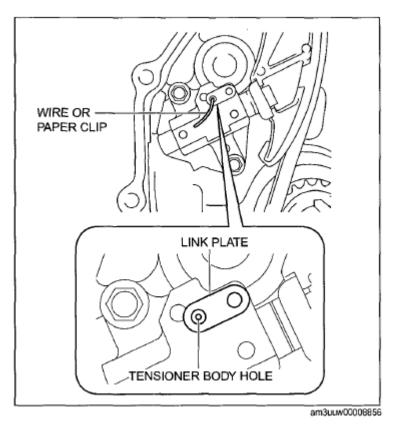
Identifying Link Plate, Tensioner Body Hole And Wire
